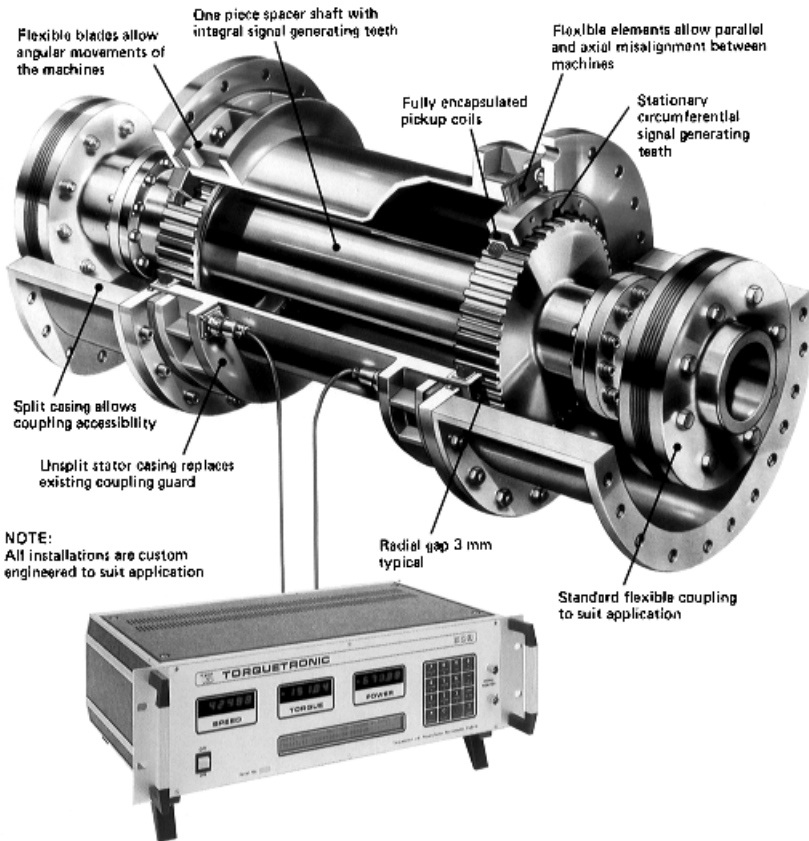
Cutaway view of Torquetronics torque-sensing components. (Torquetronics, Inc., Allegany, N.Y.)
